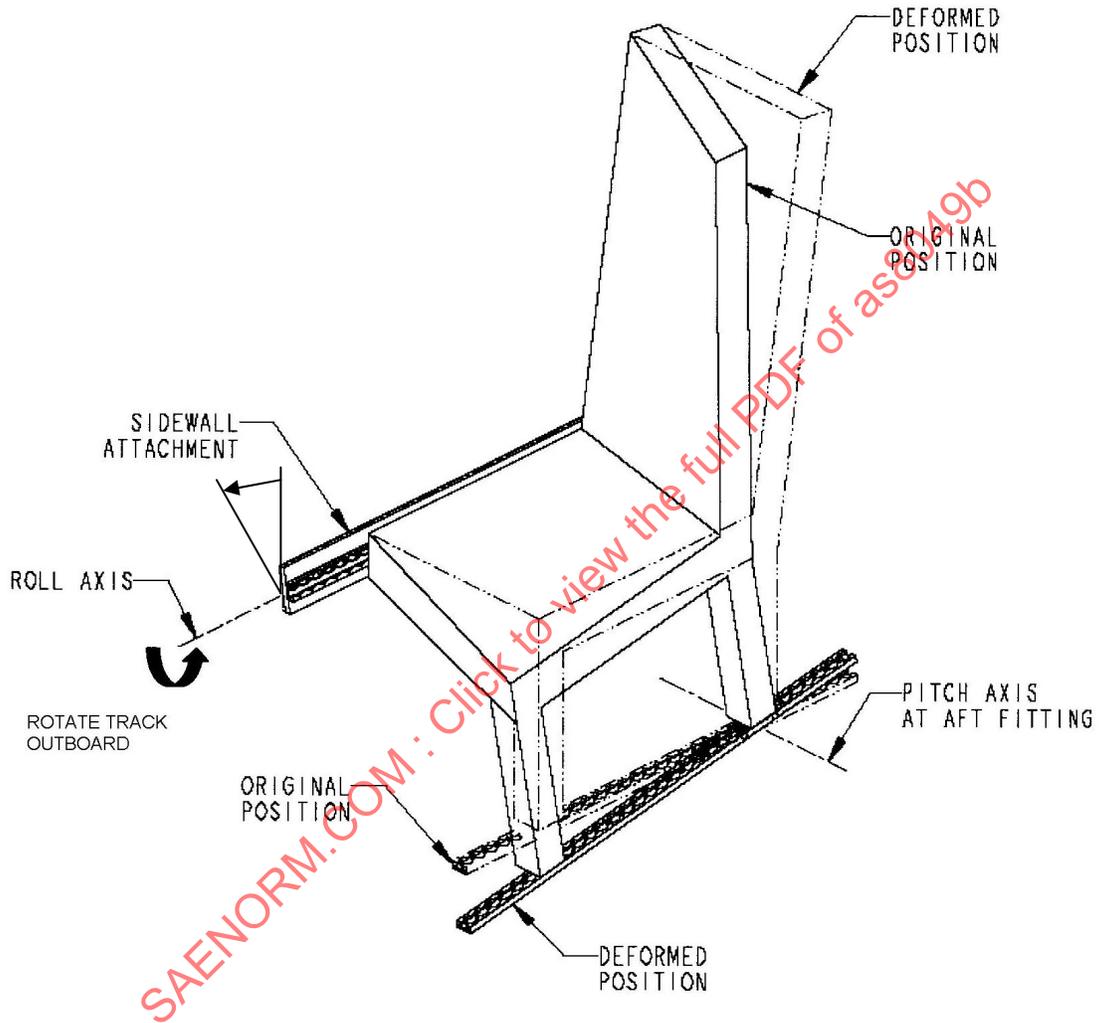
D - Schematic of Floor Deformation: Side Wall Mounted Seat
